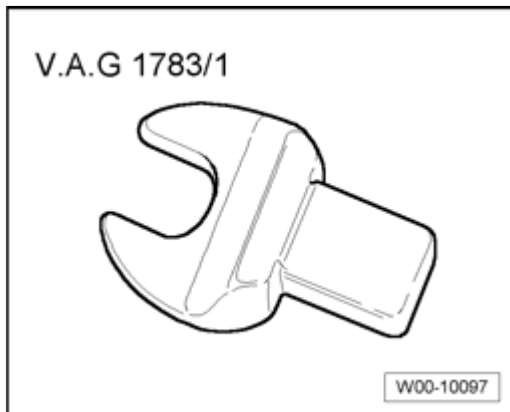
Open End Spanner Insert AF 10 V.A.G 1783/1
